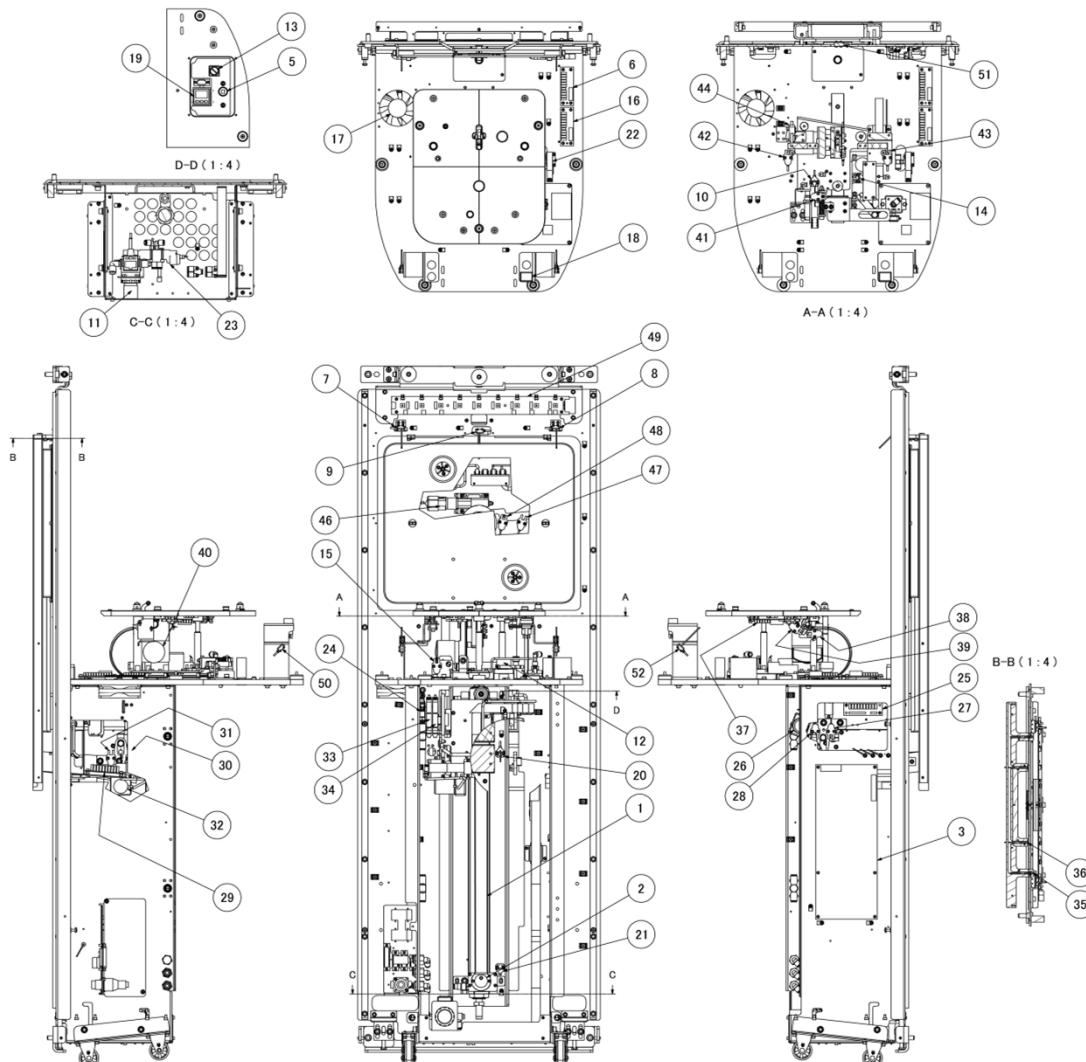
Drawing of KWF-12F3-M Label Layout
